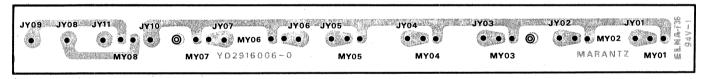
Function Lamp Board — PY01 Component Assembly Diagram
